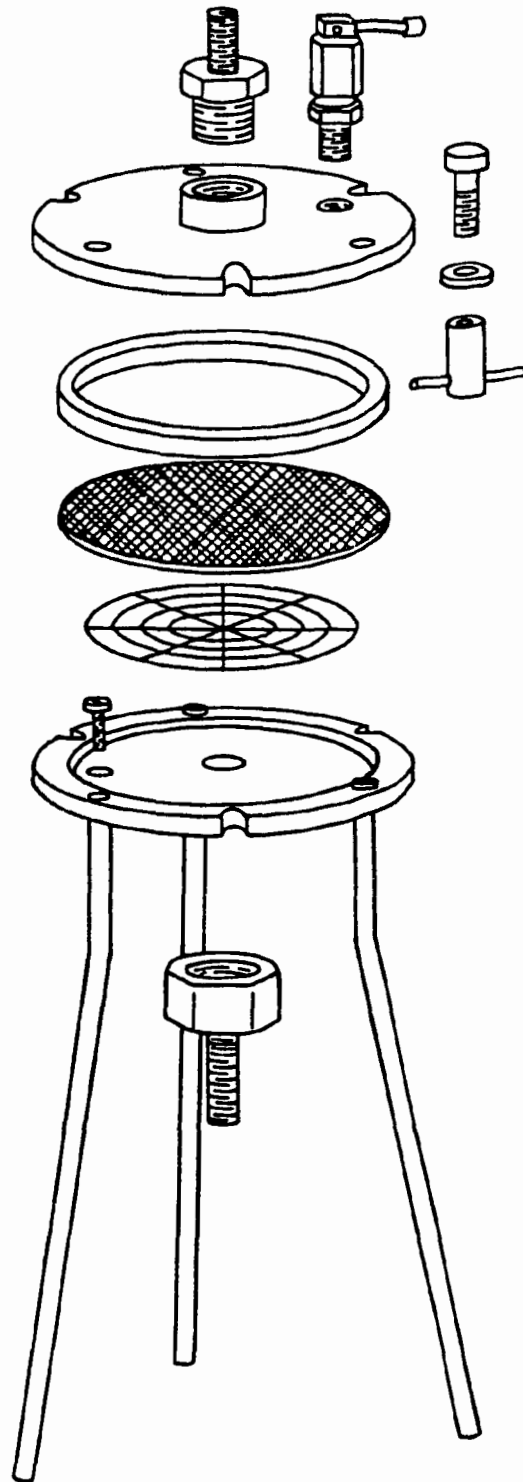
Exploded view of laboratory-scale single-plate filter press.
